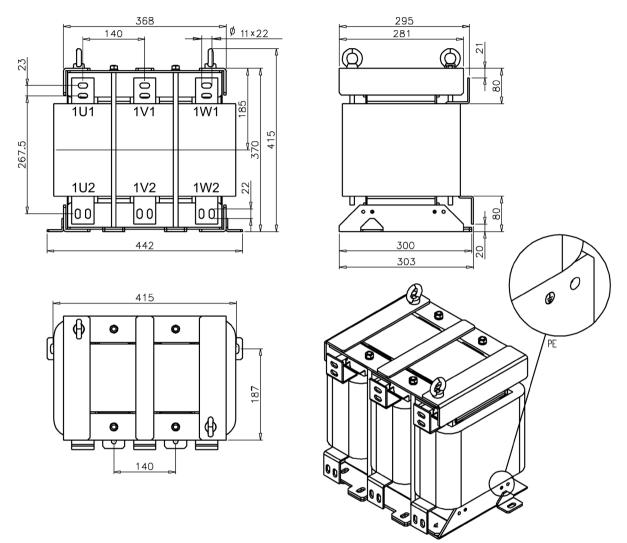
Dimension drawing of line reactor 6SL3000-0EE37-6AA0, all dimensions in mm
